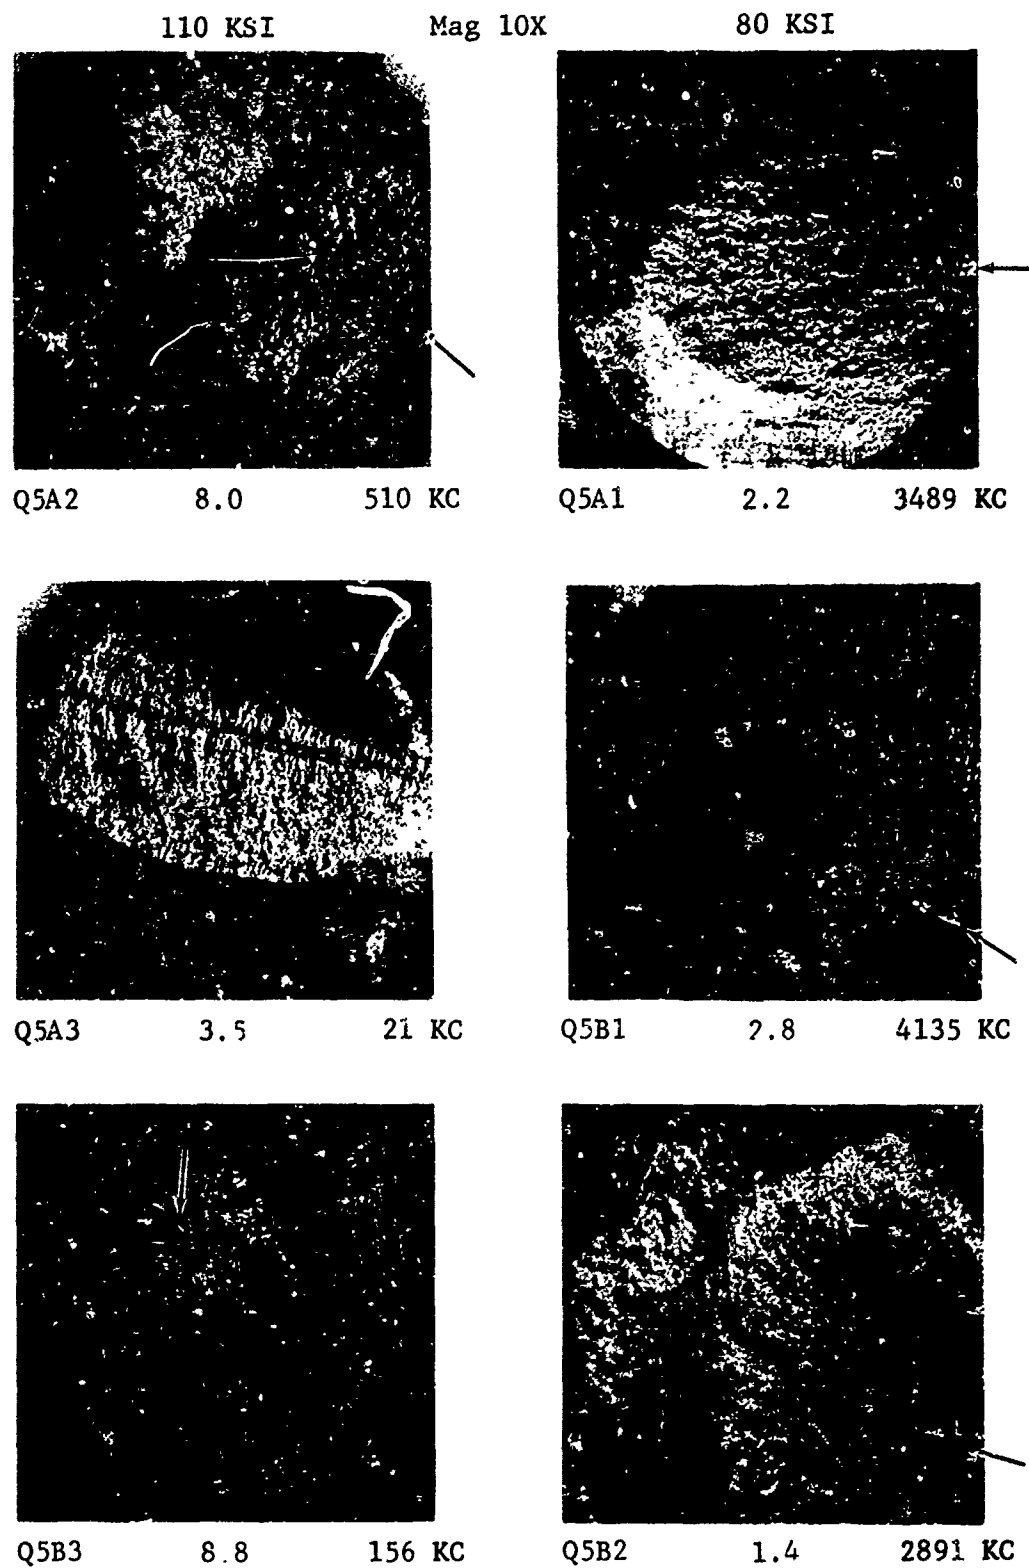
Fracture Surfaces of Failed Fatigue Specimens Series Q5-Double-Bond/Two-Axis Diffusion Bonded with ASTM Grain Size No. 8
